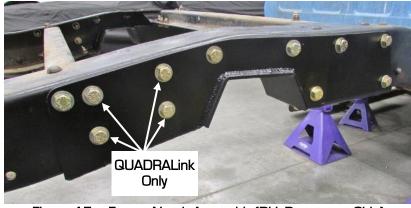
Frame Notch Assembly (RH, Passenger Side)
